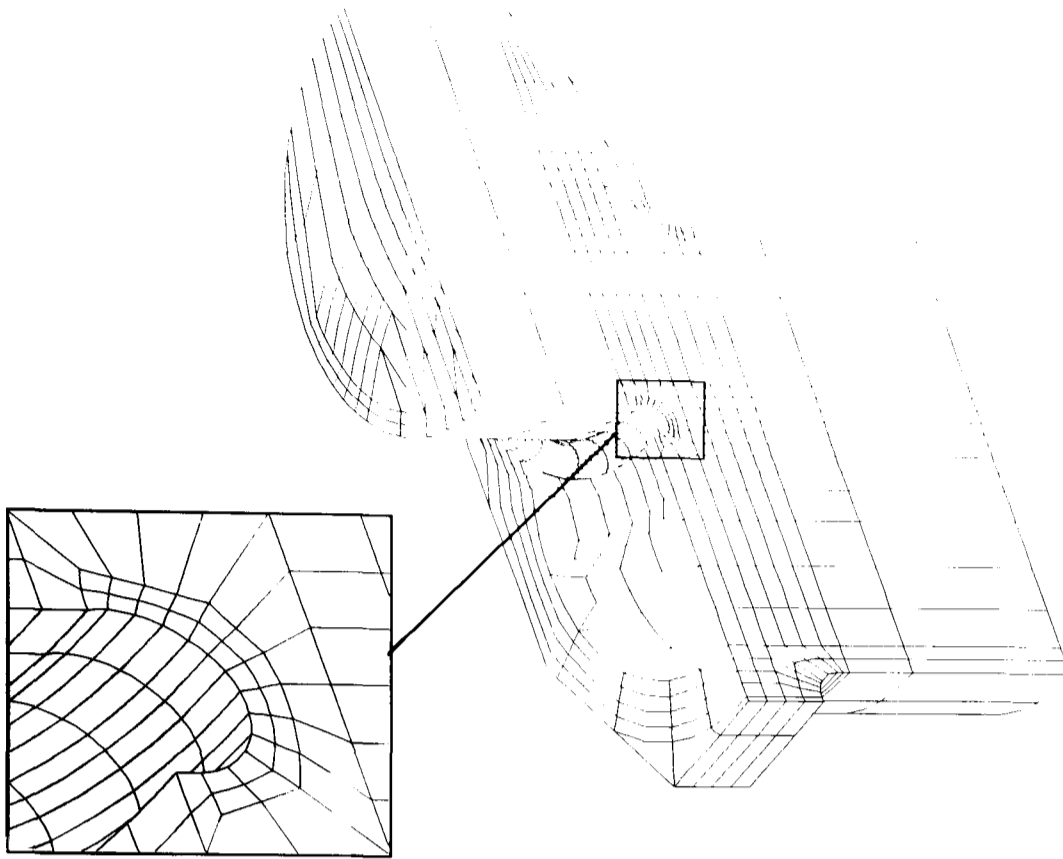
3D crankpin fillet mesh used in crankpin fillet optimisation
